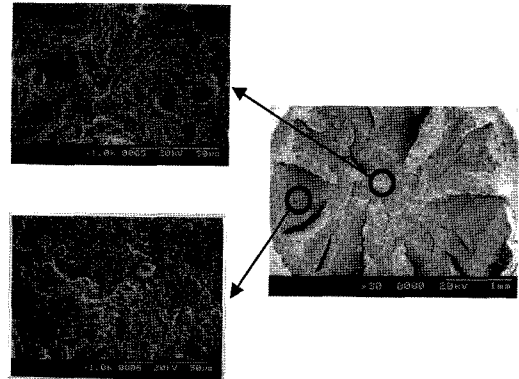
Fractography of a surface fractured by tensile load in a dissimilar friction welded joint (JLF-1 & STS304) using SEM
